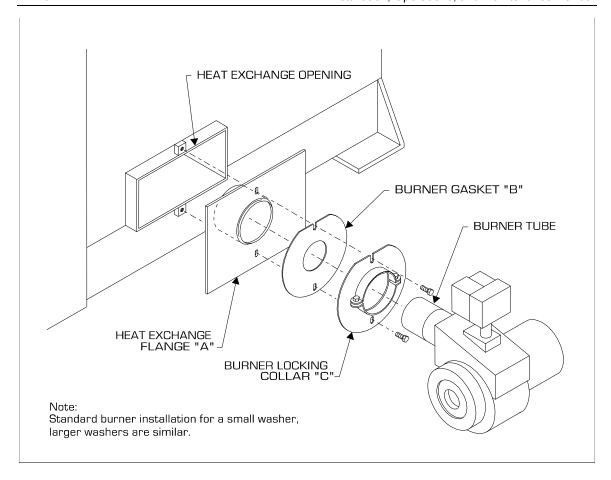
3: Mounting the Combustion Burner (Up to 180,000 BTU)
